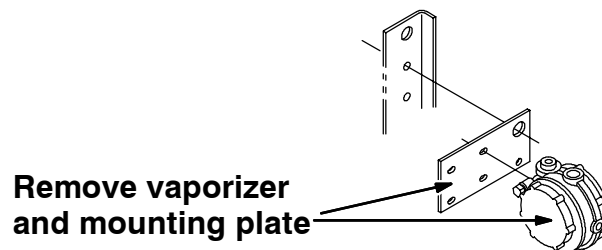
REMOVAL, VAPORIZER AND MOUNTING PLATE
